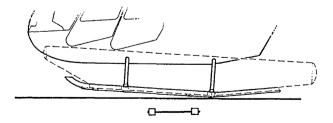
C FLOAT SHIP GROUND WHEELS REMOVAL
